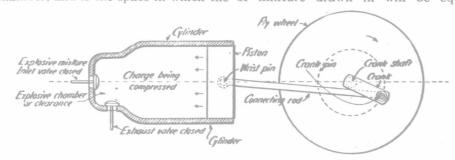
SECOND STROKE, THE EXPLOSIVE BEING COMPRESSED WITH ALL VALVES CLOSED
